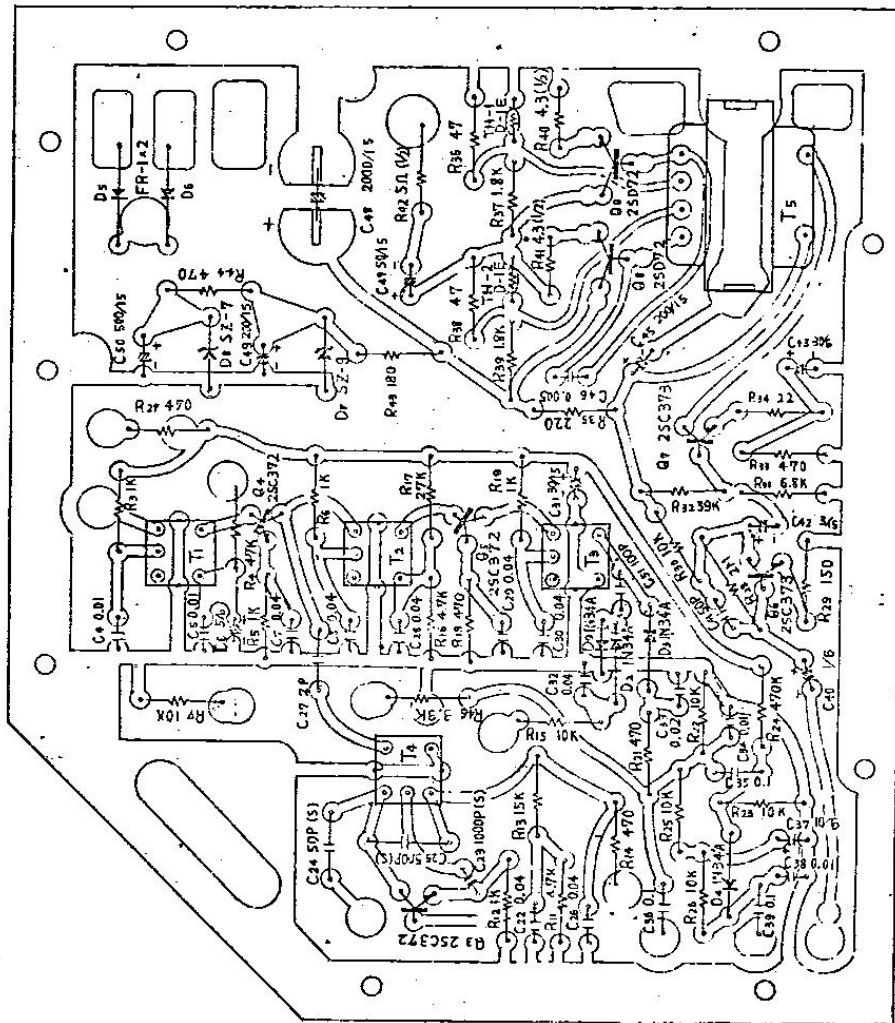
DX-120 MAIN CIRCUIT BOARD DIAGRAM (REAR VIEW)
